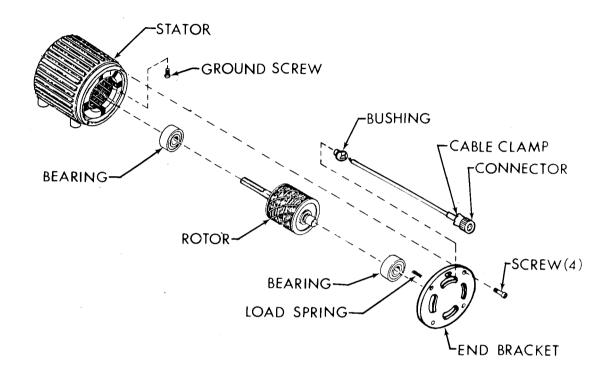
Motor Assembly, Custom Motor Design and Manufacturing Inc. Model 700-01-0602
